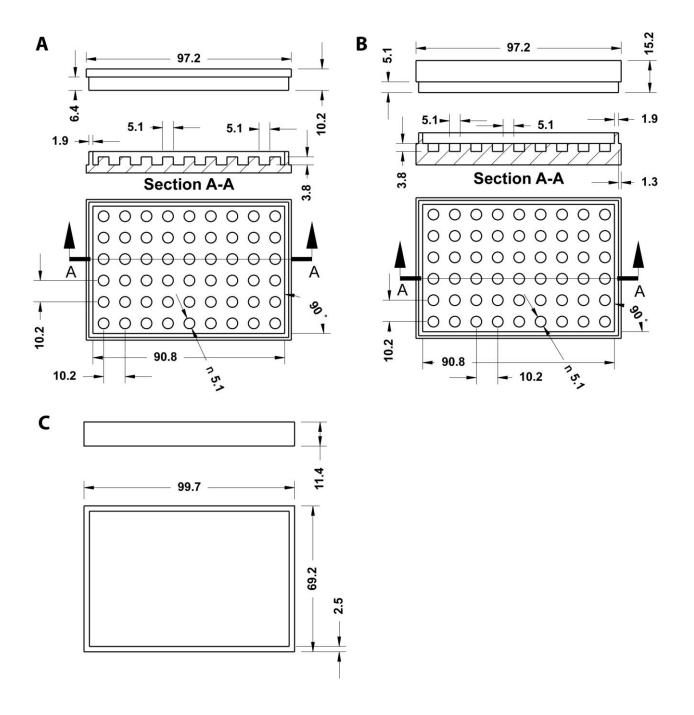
Technical drawings of the master used to fabricate solid-core, circular click-ebricks. There are three parts: (a) the bottom, (c) the top, and (c) the union that holds them together during the molding process. All dimensions are in millimeters.
